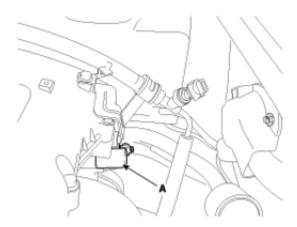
Identifying Exhaust OCV Courtesy of HYUNDAI MOTOR CO.
